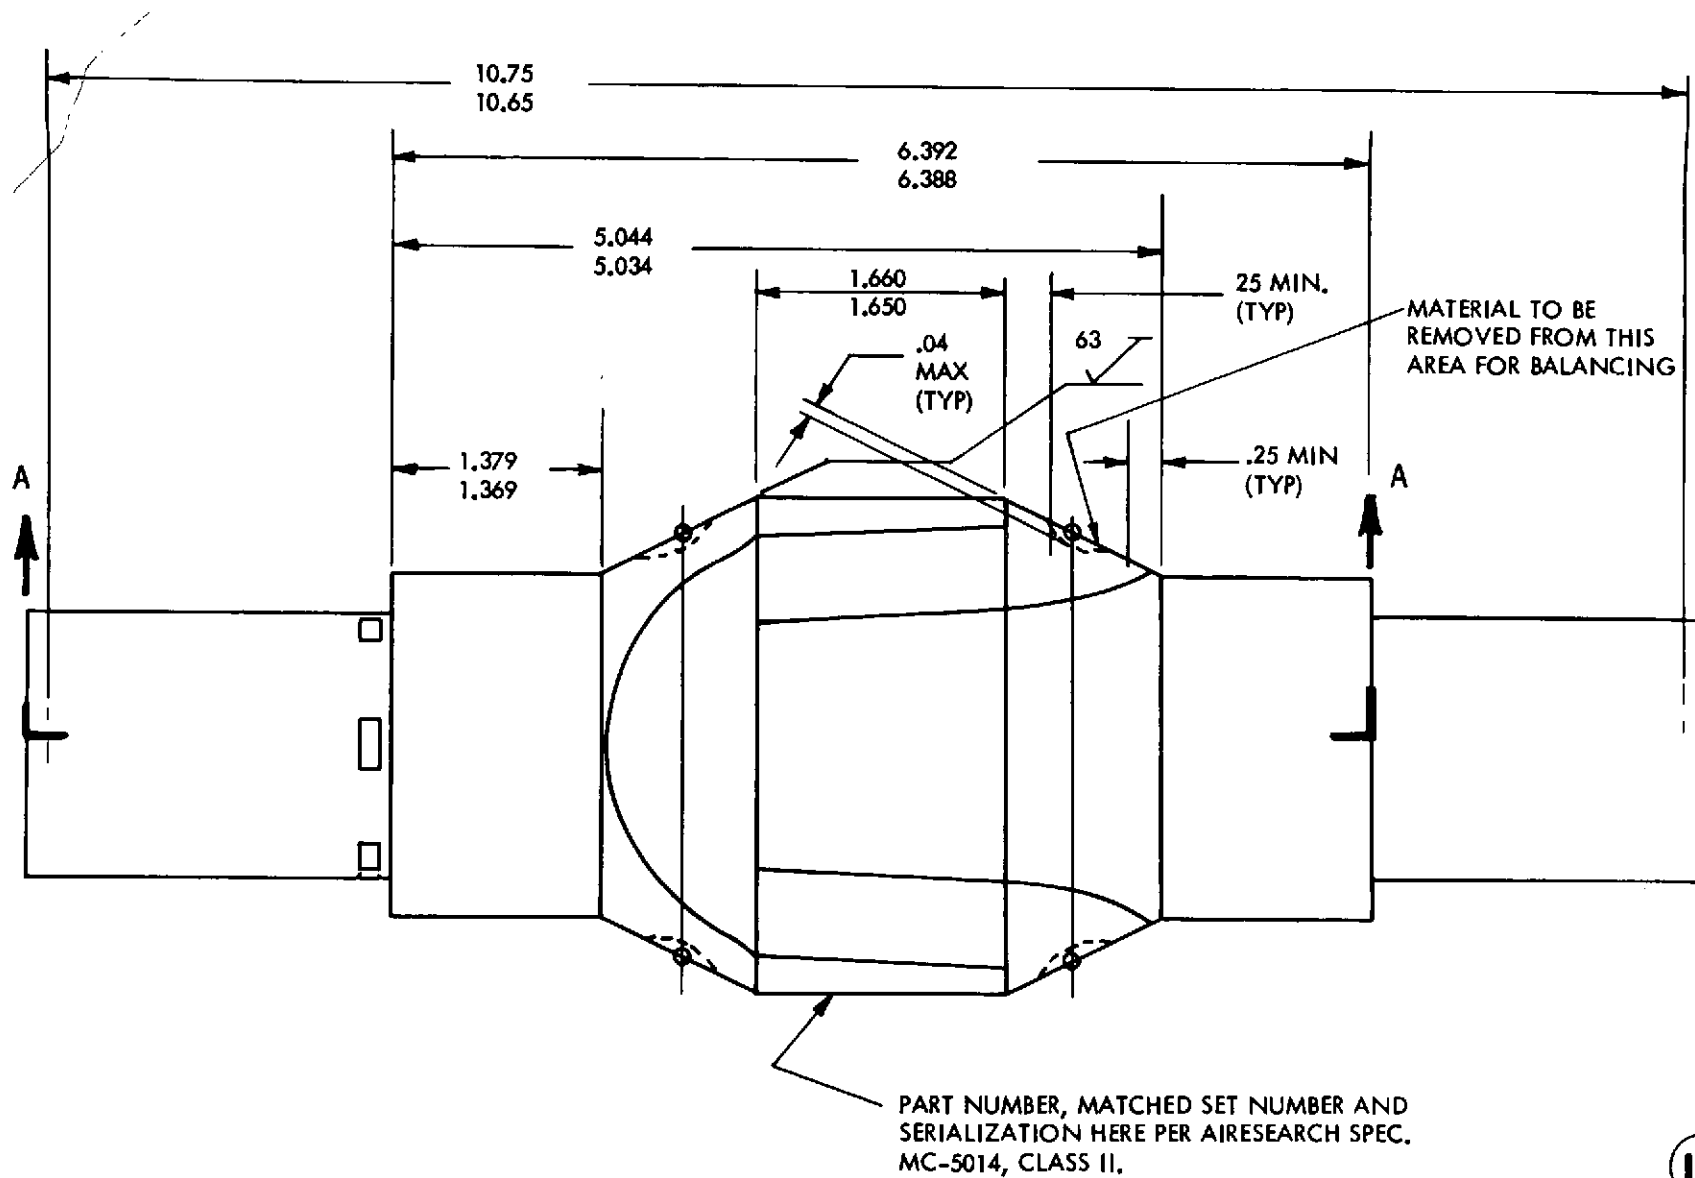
Outline Drawing of Finished Rotor (Reference 2)
